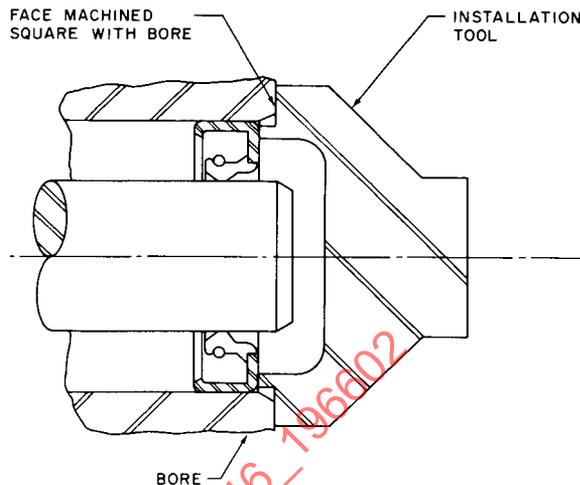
THROUGH BORE: INSTALLATION TOOL BOTTOMS ON MACHINED BORE FACE
